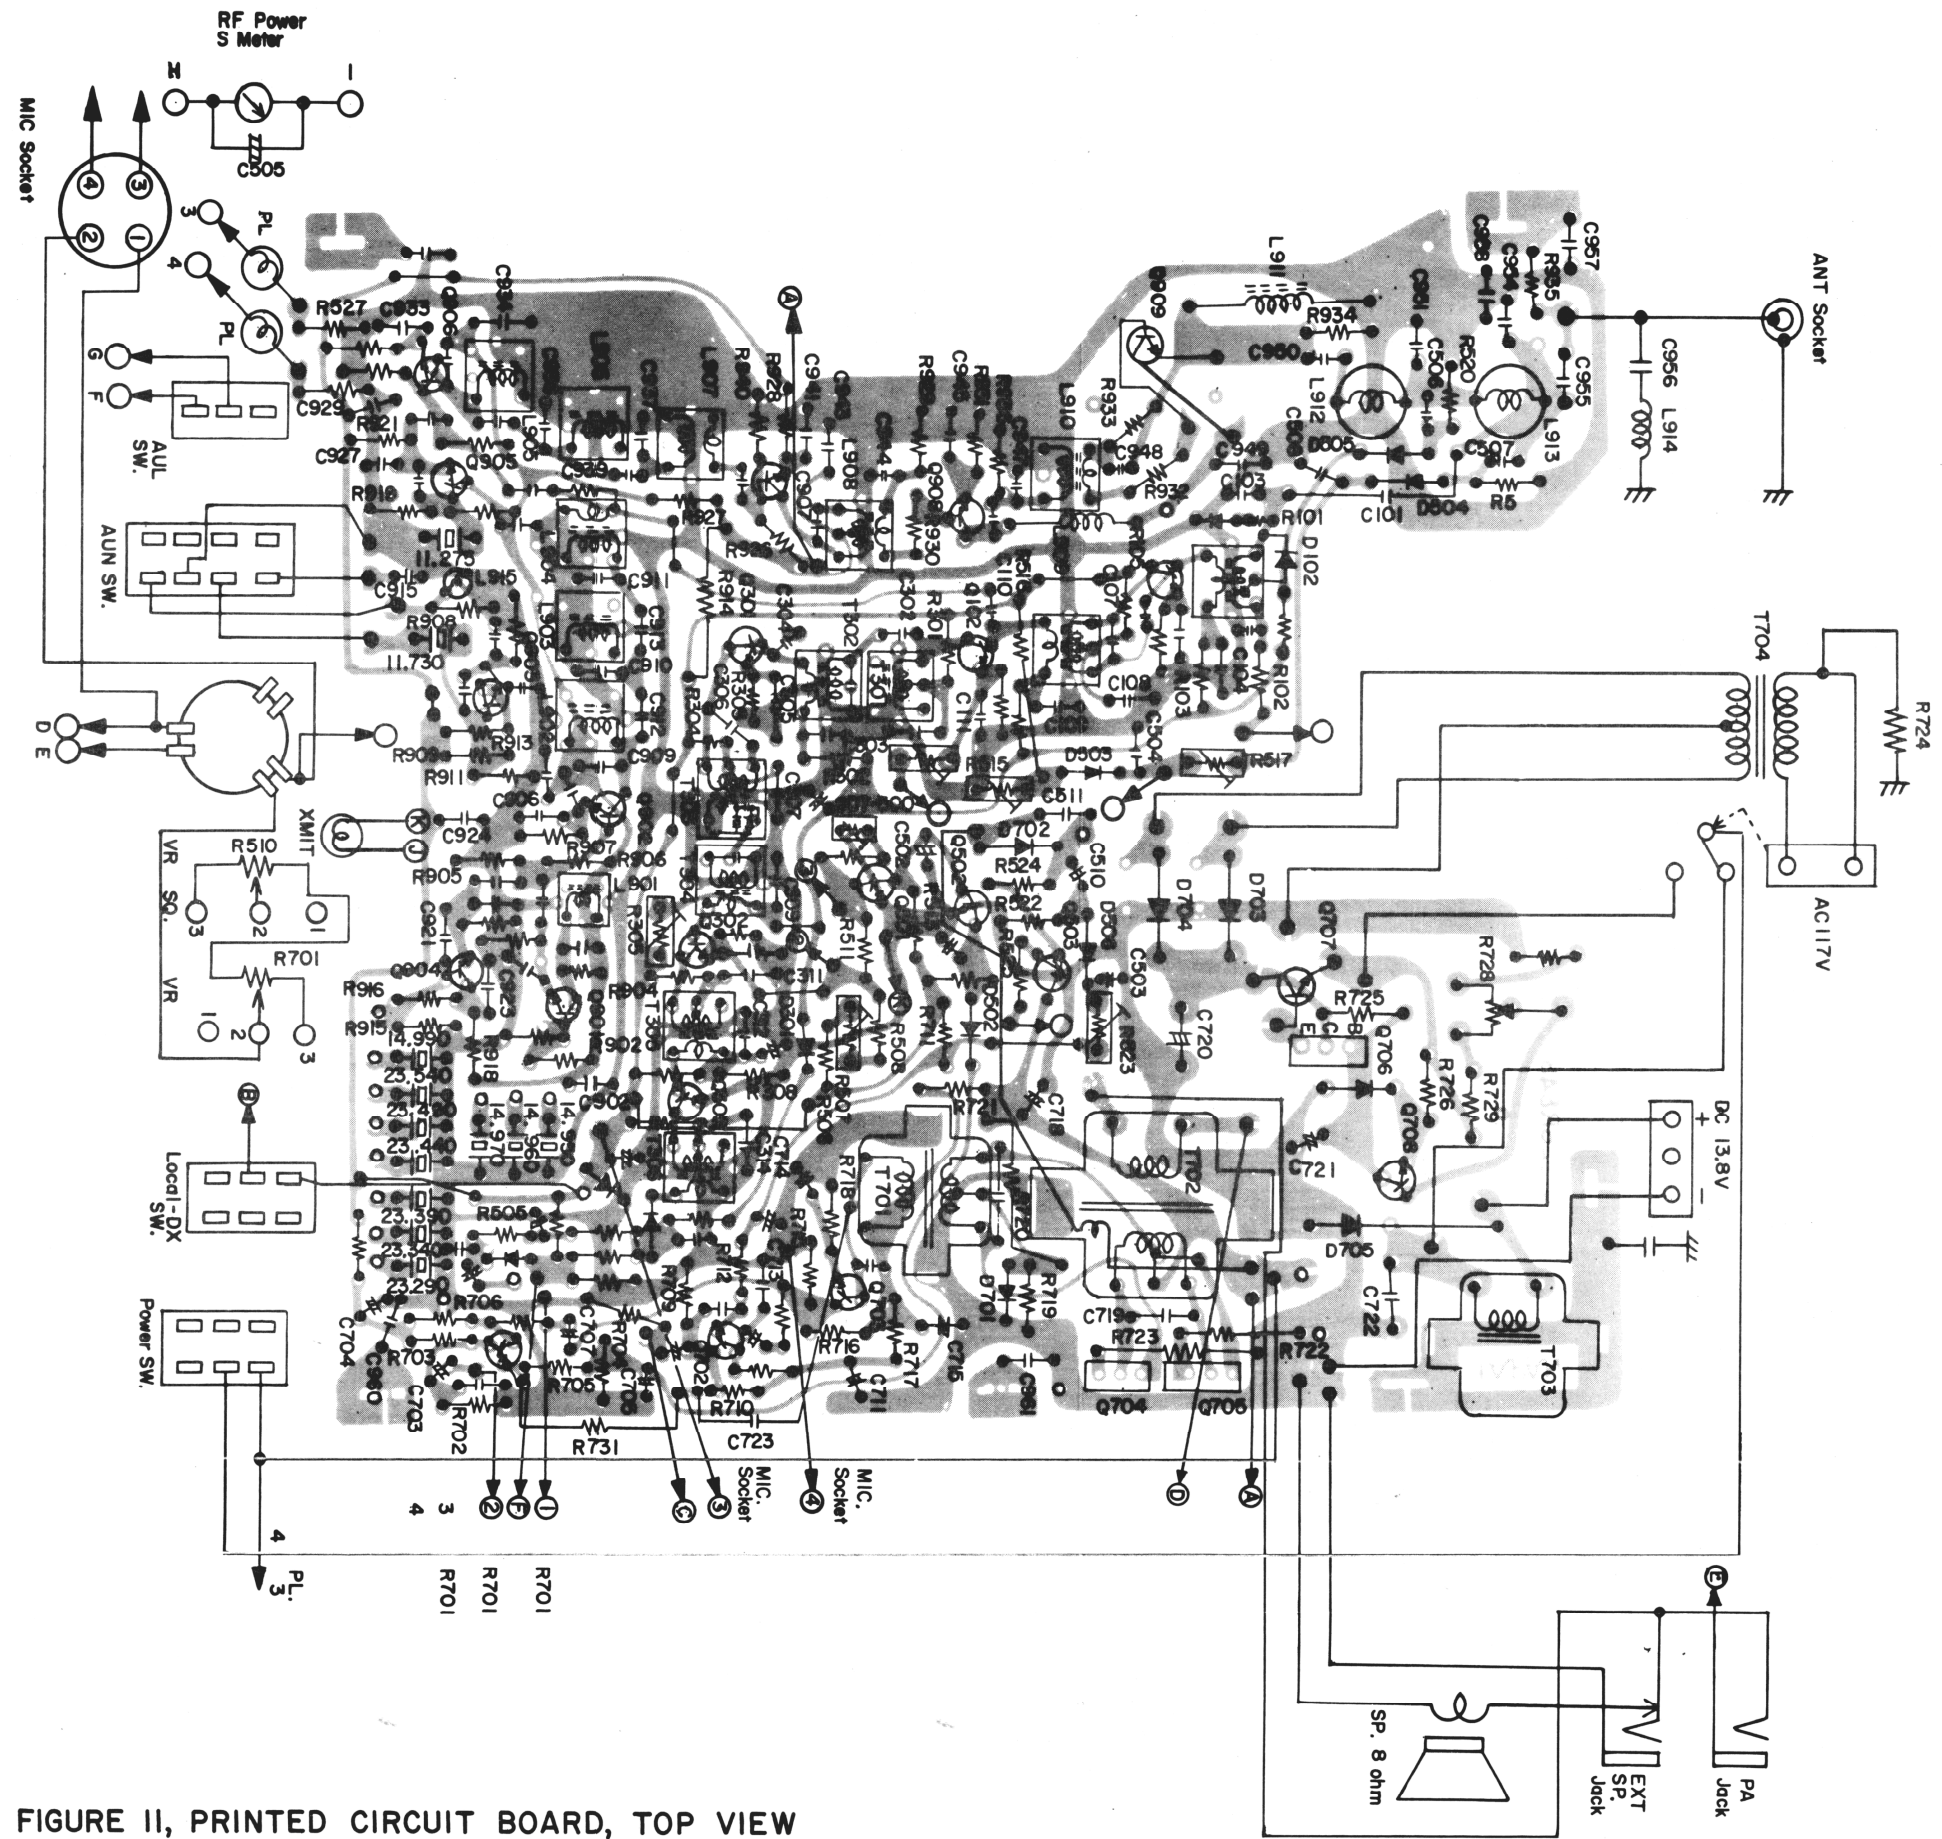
FIGURE II, PRINTED CIRCUIT BOARD, TOP VIEW
